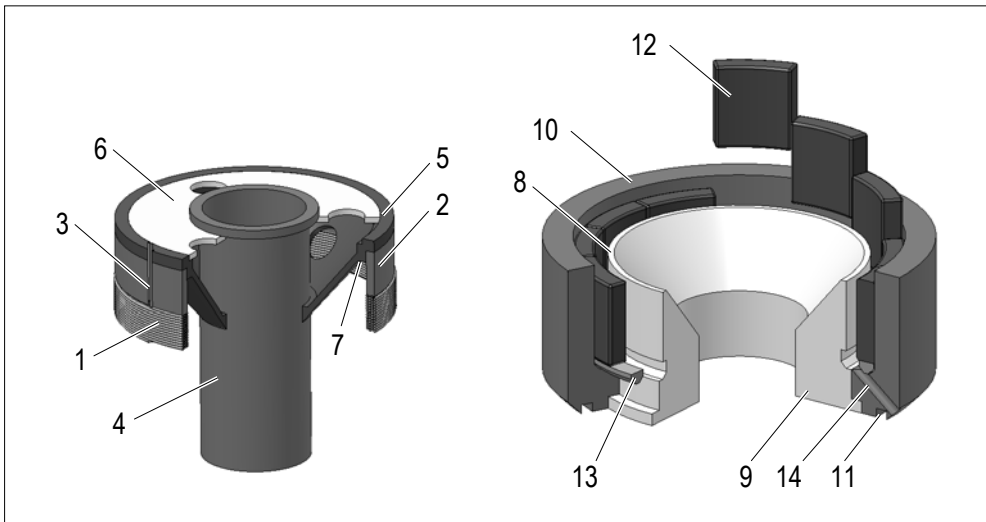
Overview of the components of the coil assembly (left) and the field assembly (right).
